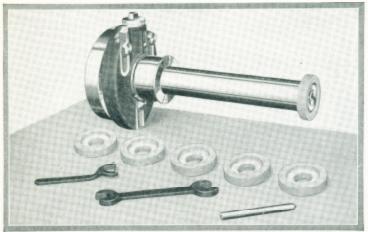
C -- Grinding Spindle, Wheels and Wrenches.
